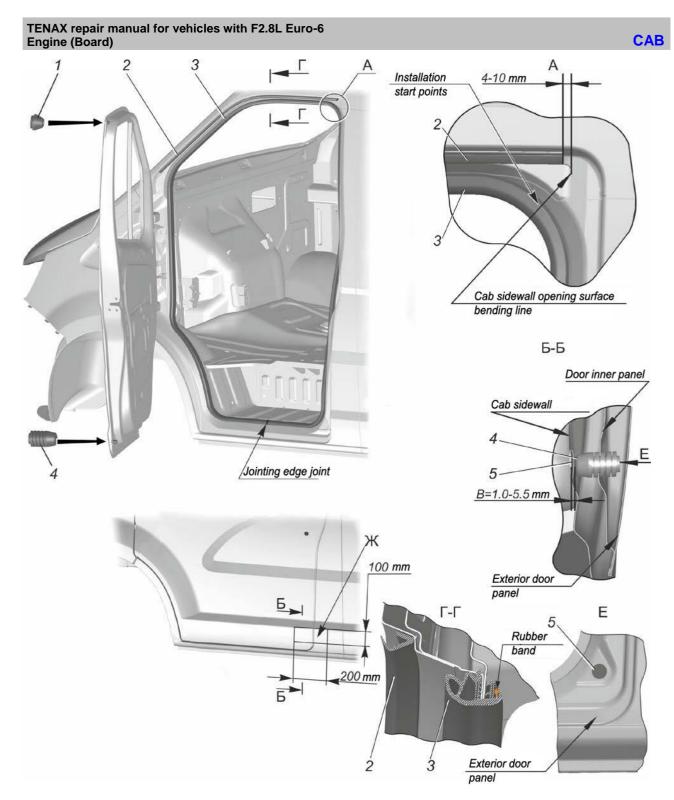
Door seal installation: 1,4 – buffers; 2 – seal; 3 – jointing edge; 5 – protective sticker
